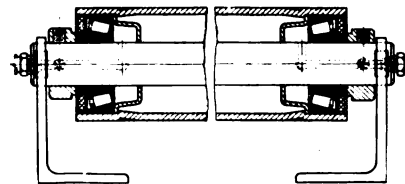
TYPICAL BEARING MOUNTING FOR GRAVITY CONVEYOR ROLLER
